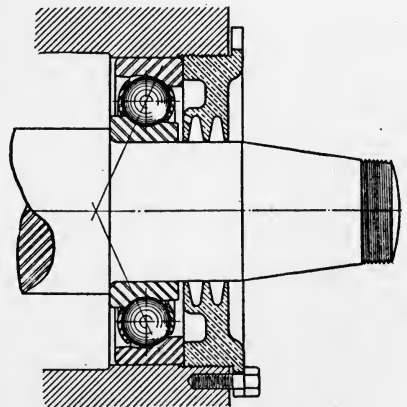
Cross section of magneto ball bearing showing angular contact.
